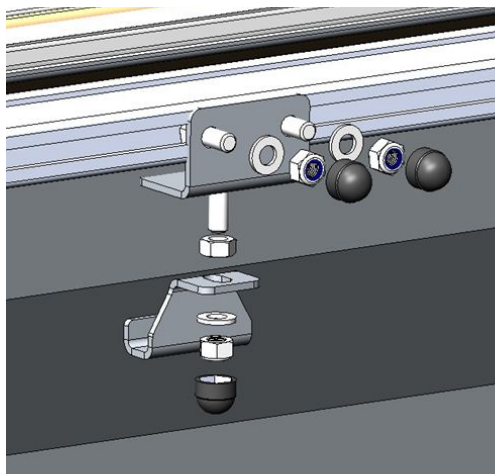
Position the angle bracket over the bolts and fasten using the accommodating washers, nyloc nuts and nut caps. Attach the hook bracket to the underside of the load bin lip and fasten it to the angle bracket using a M8x25 hex head bolt, washers, nylock nut and nut cap.
